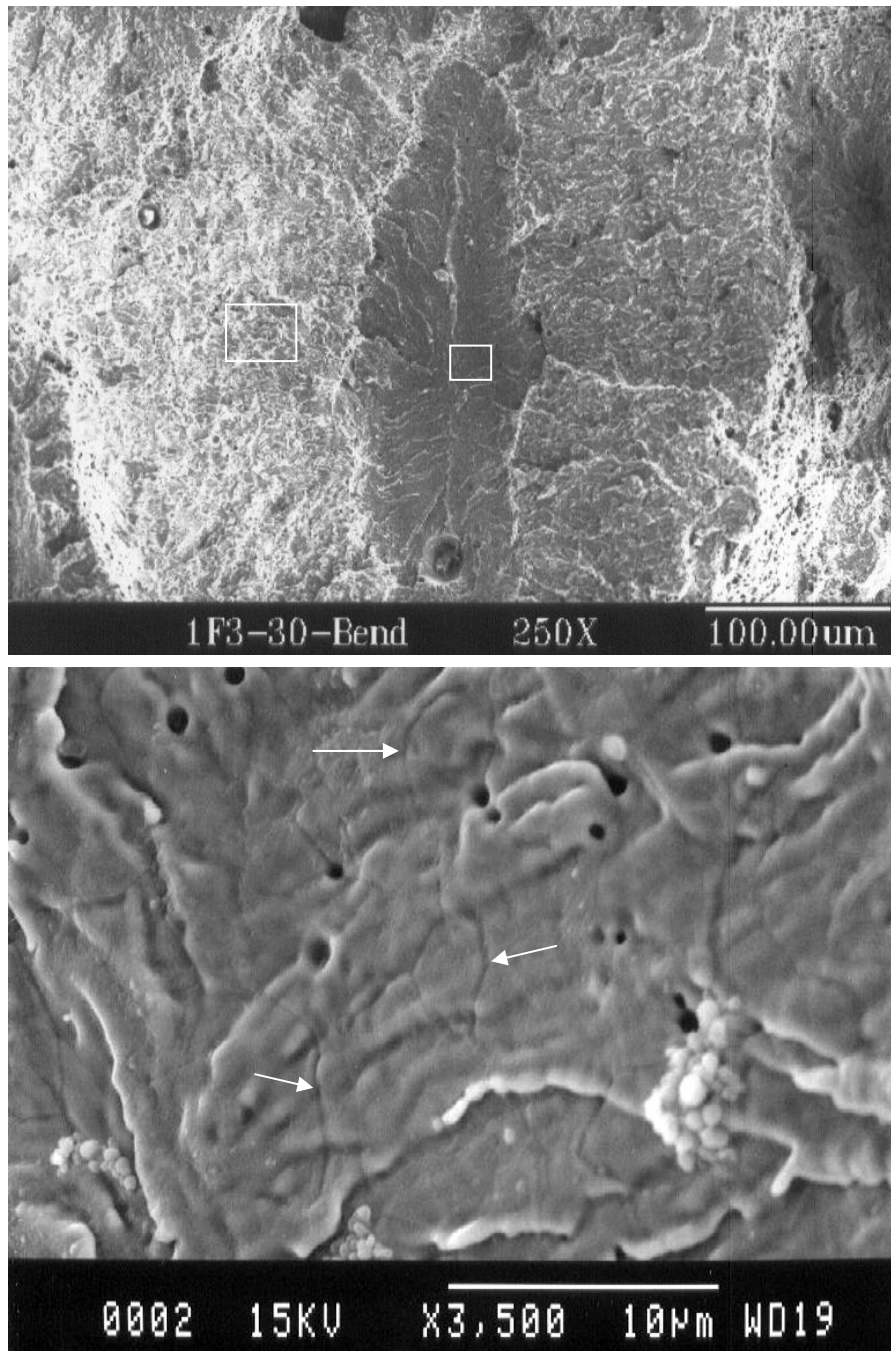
A micro-crack initiated brittle cleavage on the fracture surface of a bend-test specimen from a 1F3 V-groove weld. Top: the micro-crack (central region) propagated initially by brittle cleavage before changing to ductile void coalescence. Bottom: Thermal grooving (arrows) is visible in a high magnification view of the central region from above (white box).
